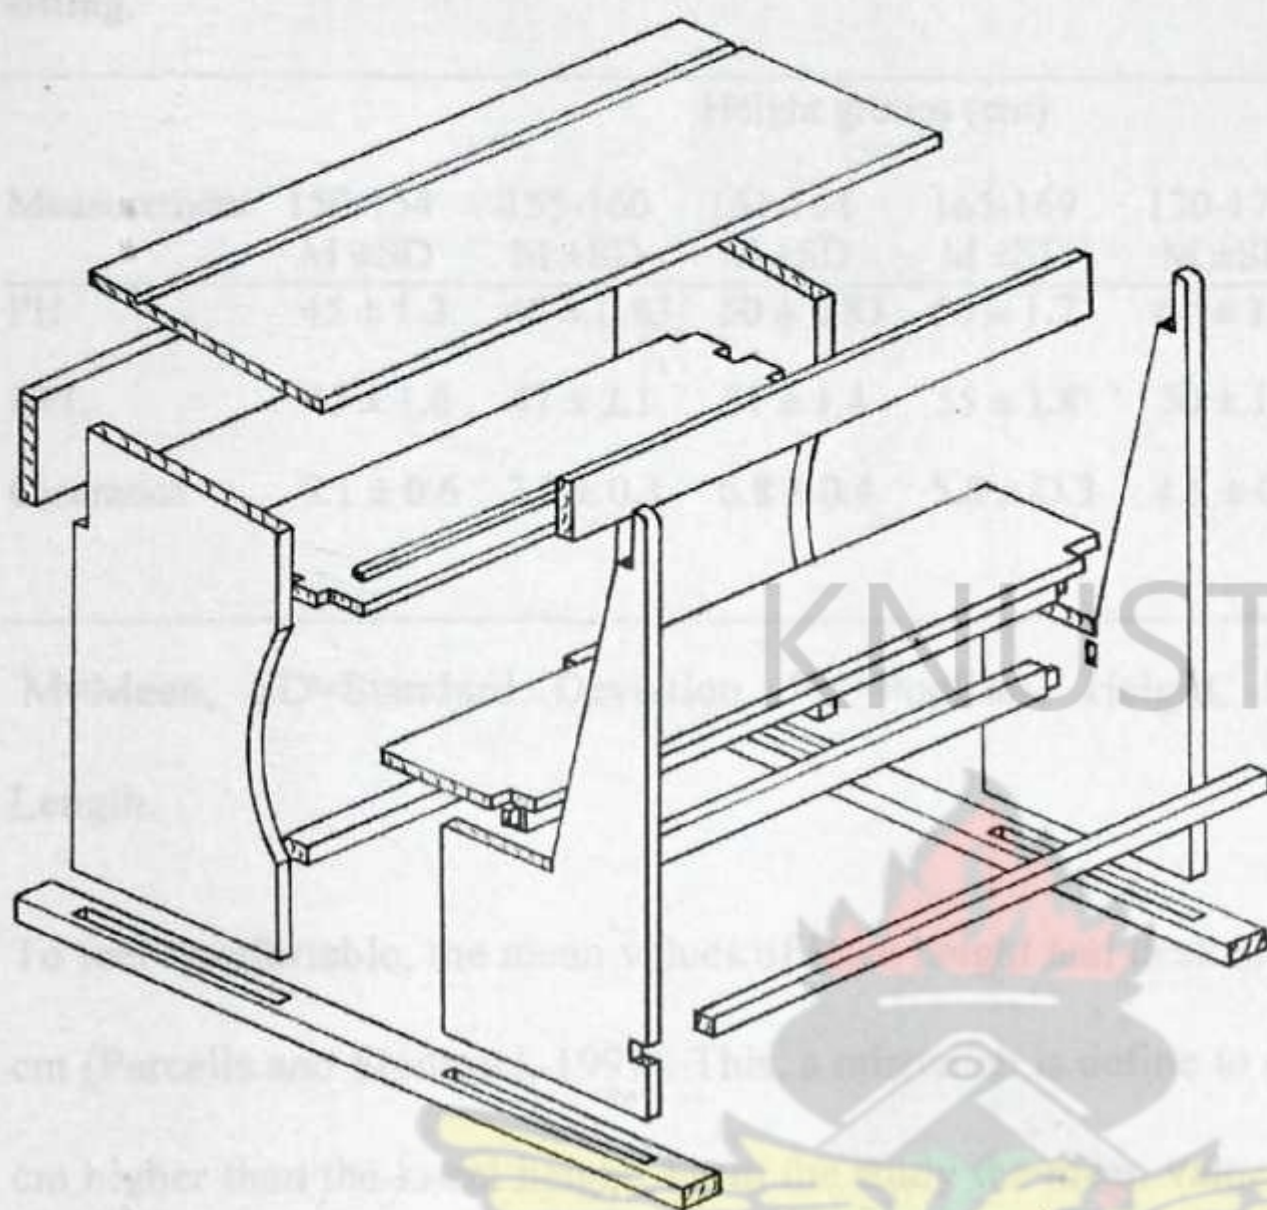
An exploded view of furniture used by students of Agona Secondary Technical School.
